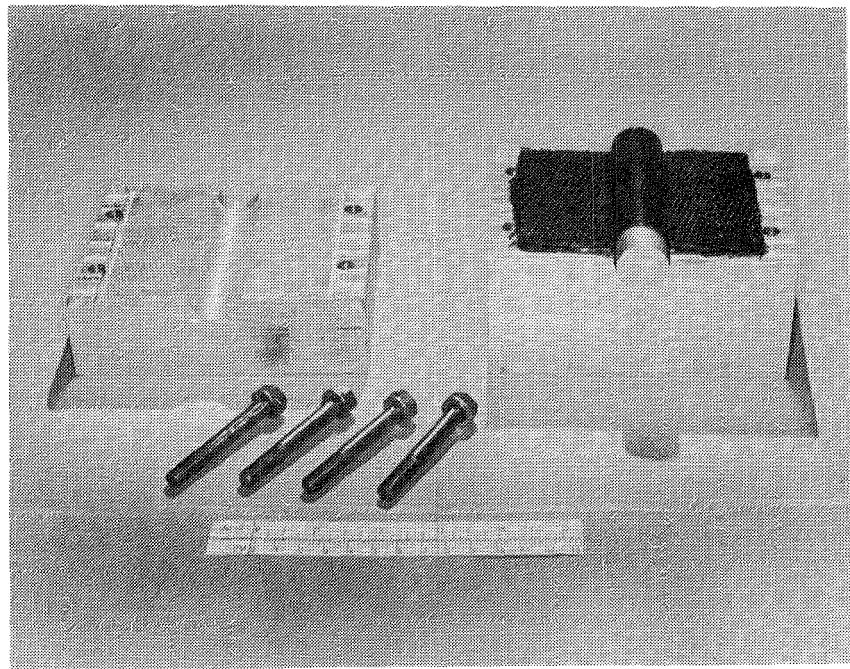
"Tee" Connector Web Blank Prior to Removal from Mold
